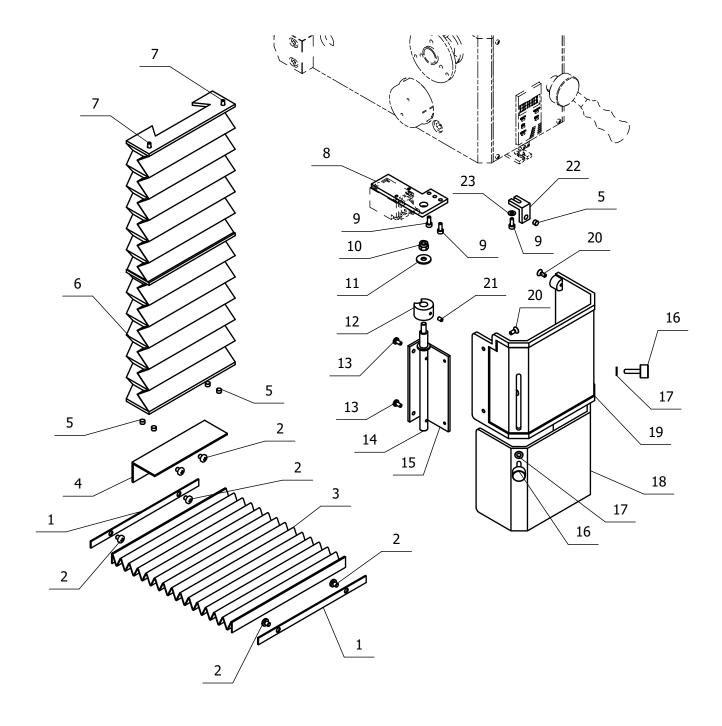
Replacement Parts Illustration for Dustproof and Chuck Guard Assembly
